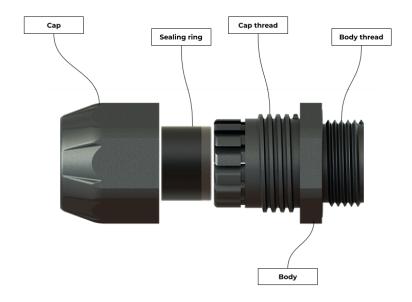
Cable gland assembly. Flat washer which goes against the enclosure and the lock nut are not shown.
